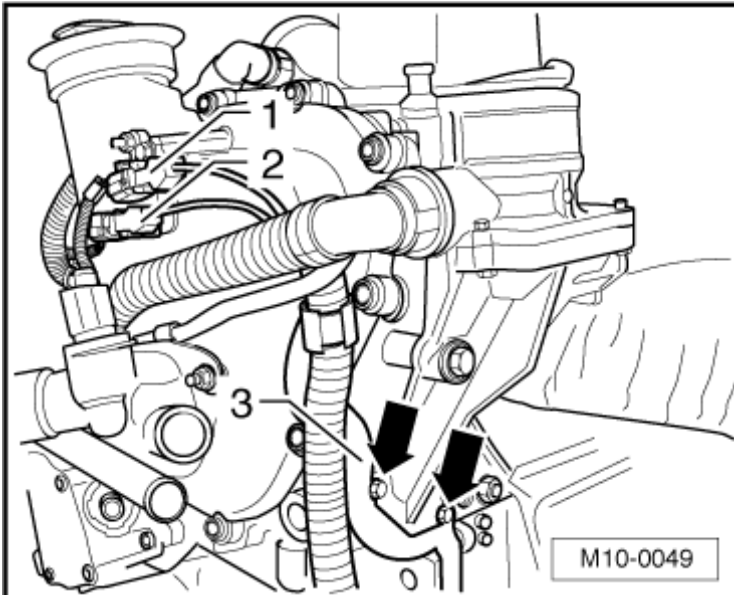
Identifying Harness Connectors To Disconnect And Remove Bracket
